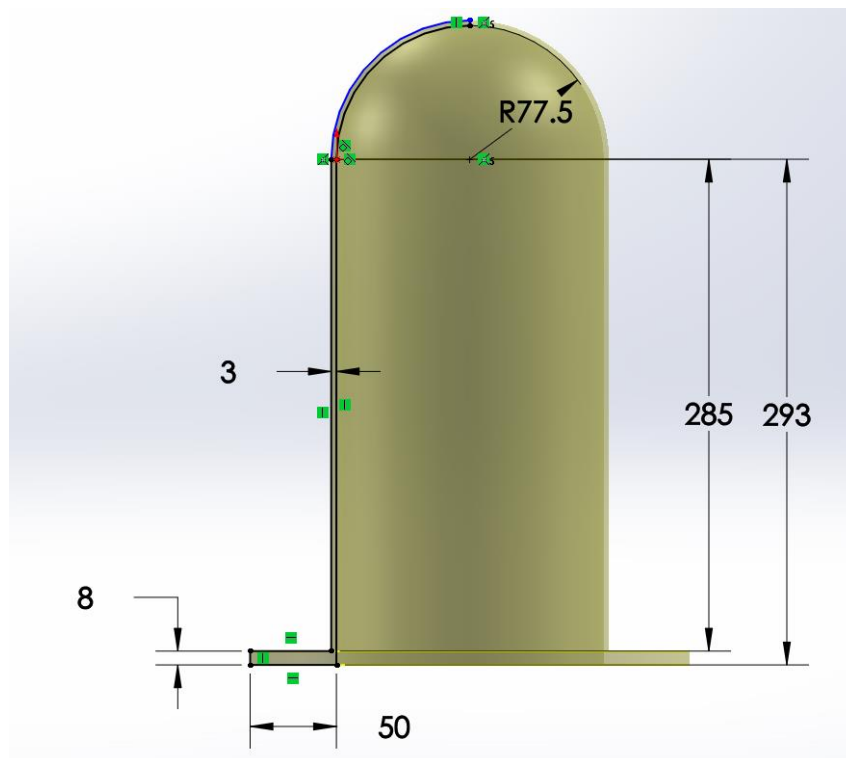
Dimensions (in mm) of domed cylinder for 3 bar pressure test.
